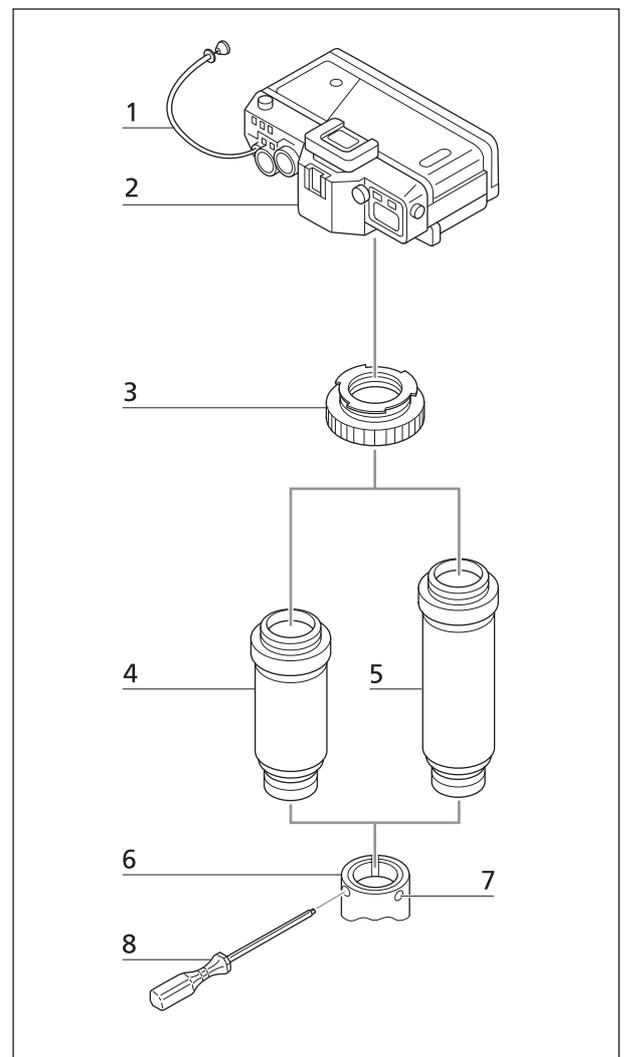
Attachment of 35 mm SLR cameras with SLR adapter 2.5× to 60 mm camera port
